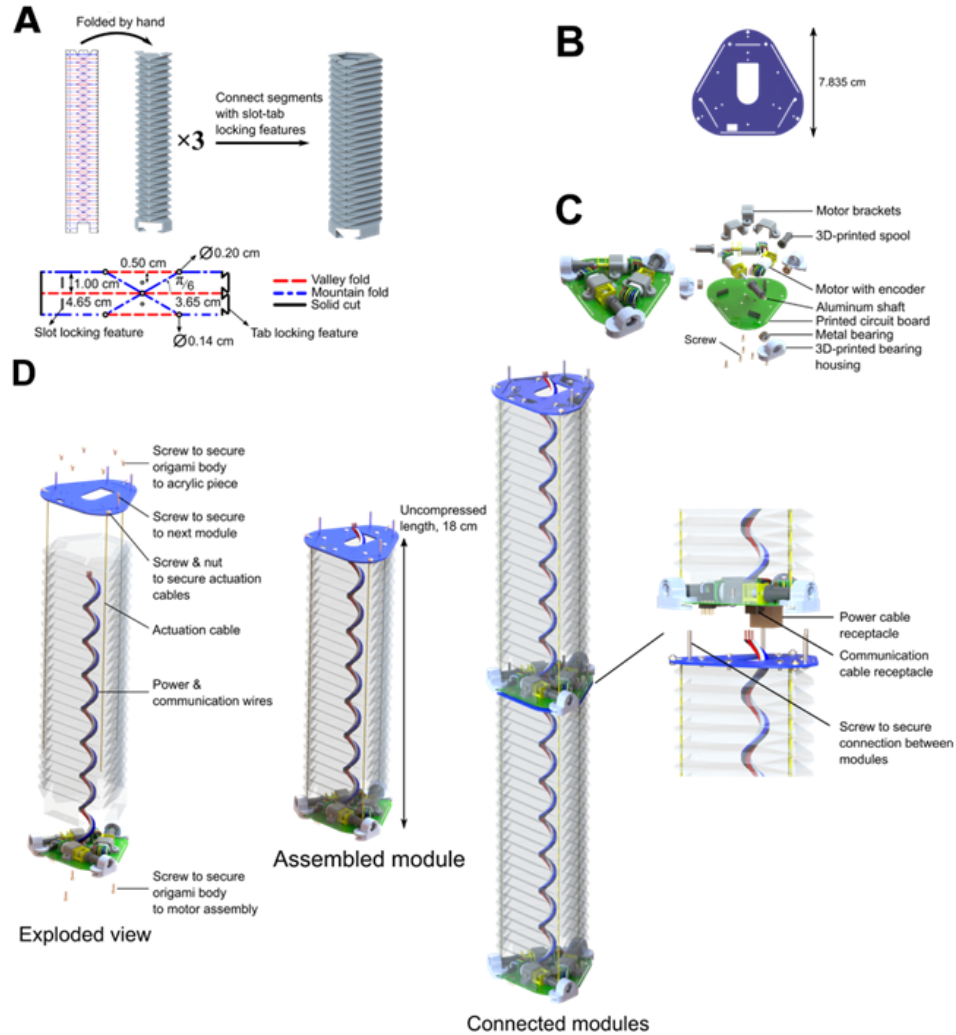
(A) Origami body assembly, (B) acrylic top plate, (C) motor assembly, (D) origami module assembly. [8]
